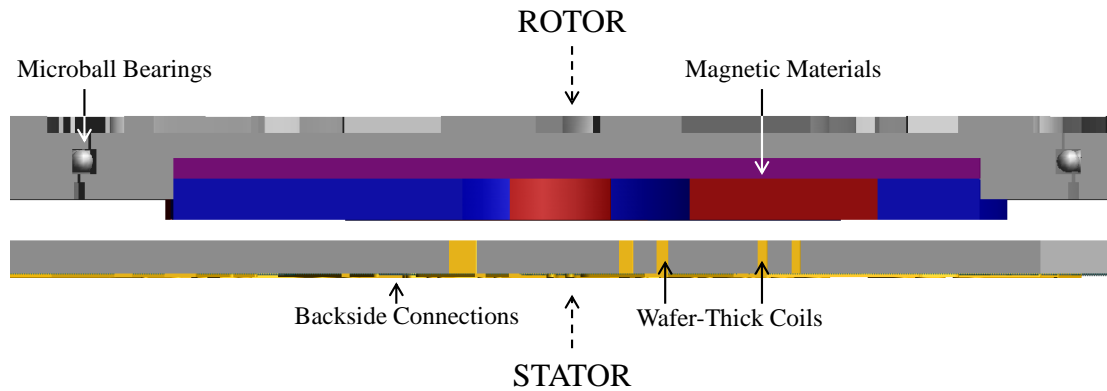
Schematic of the micro-turbo-generator showing the rotor, stator, microball bearings, integrated magnetic materials, and coil structure with backside coil connections.
